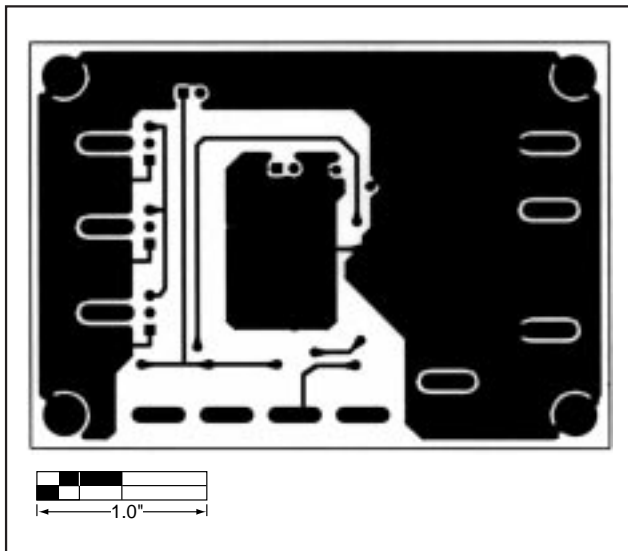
MAX1701 EV Kit PC Board Layout—Solder Side
